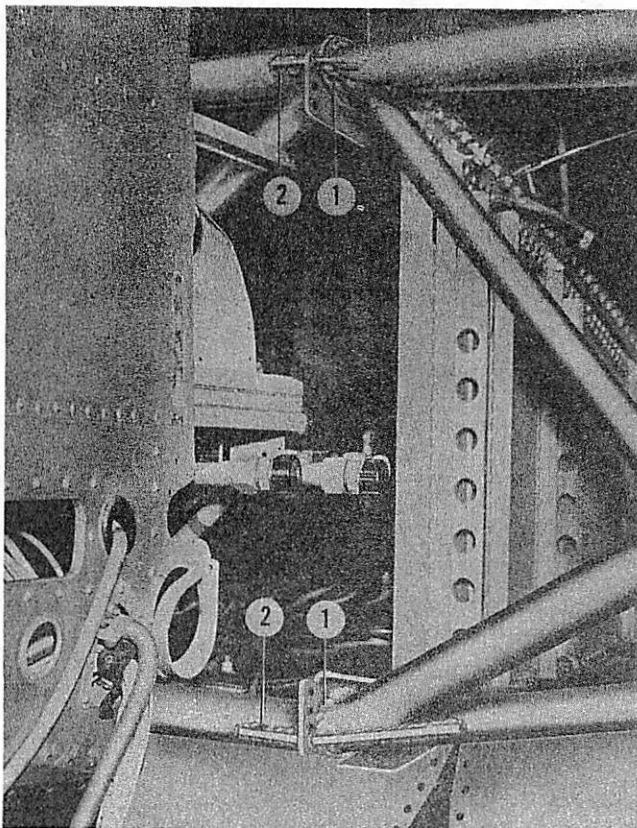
Alternate Welding Center Section to Outboard Section Gussets
